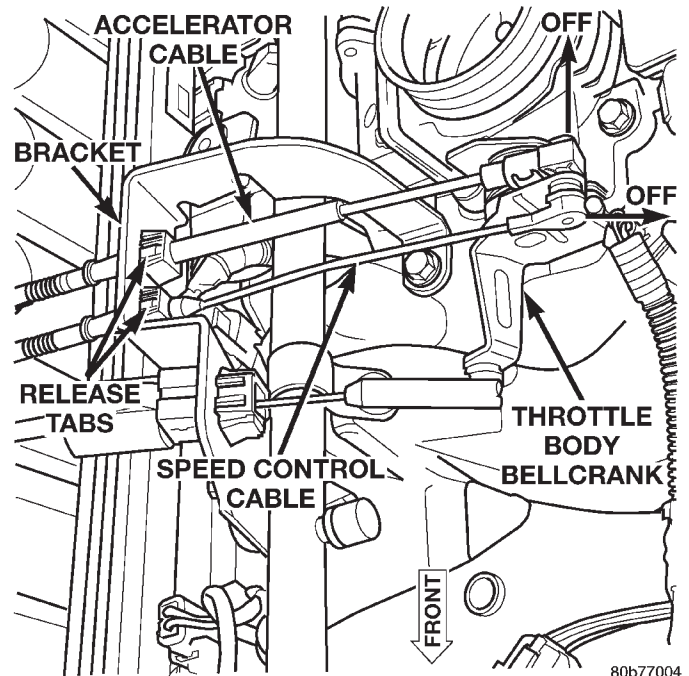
Throttle (Accelerator) Cable at Throttle Body—4.0L Engine
